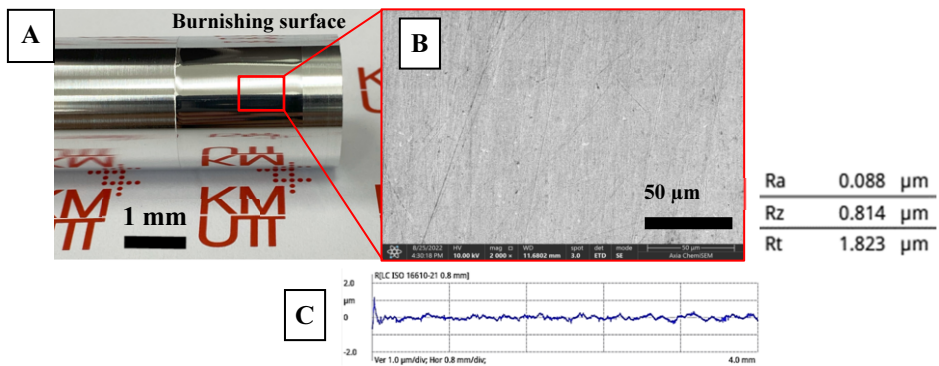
The finished surface of Al6063 by Final turning and burnishing tool (A), the magnified SEM image (B), and the surface roughness of the burnishing process(c)
